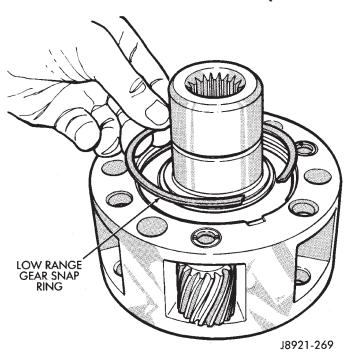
Low Range Gear Snap Ring Removal/ Installation
